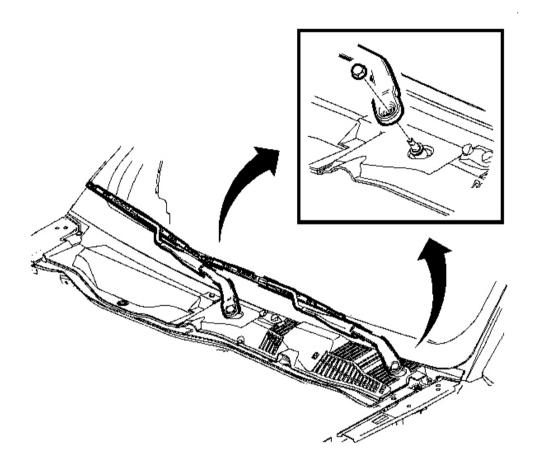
Removing/Installing Wiper Arm Courtesy of GENERAL MOTORS CORP.
